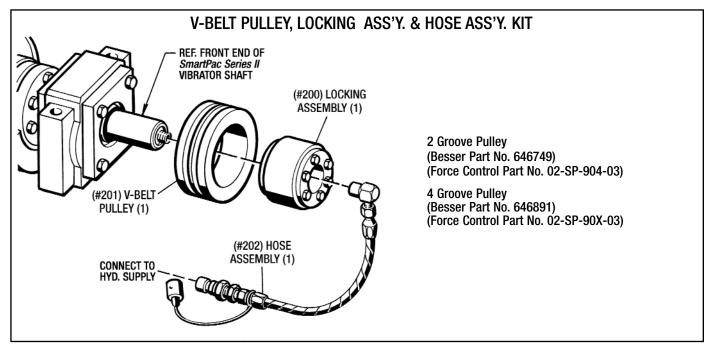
V-Belt Pulley and Hose Assembly Kit
